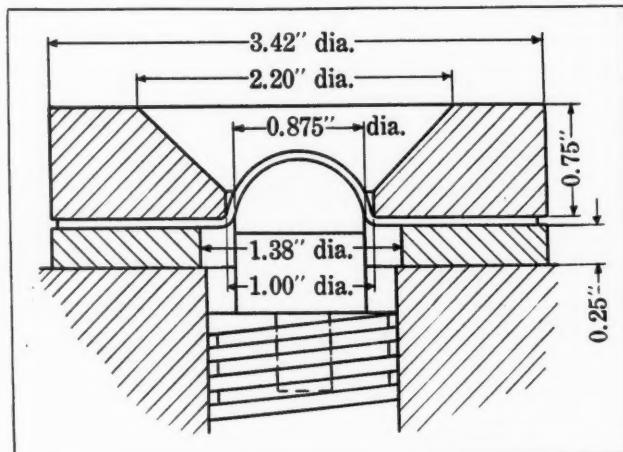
Section of Punch and Die Used in Machine Shown in Fig. 1
